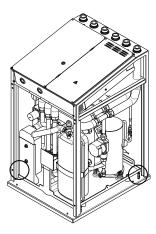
Removing the screws fastening the heat pump to the pallet
